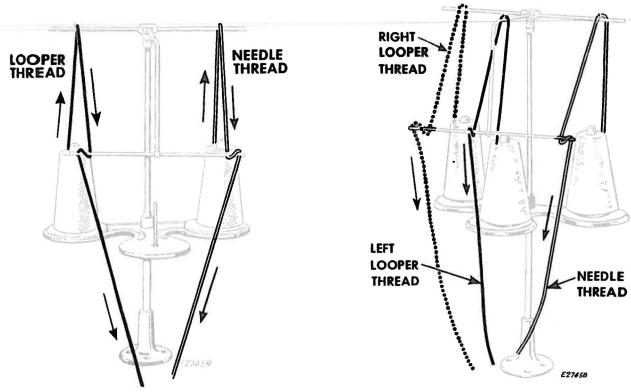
Unwinder 151031 Threaded for Two-Thread Stitch
